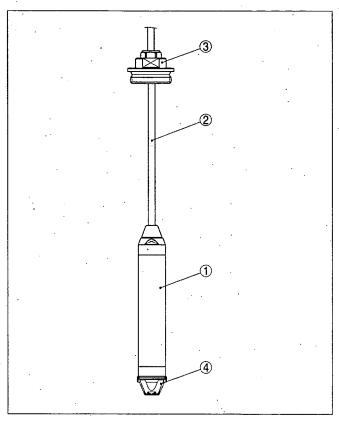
Example of a VEGAWELL 72 with screwed connection
